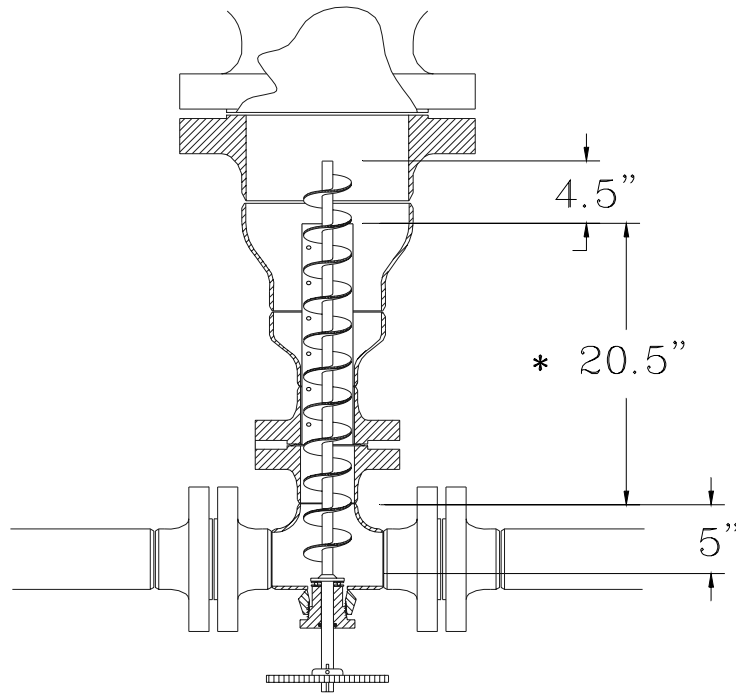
Modified Auger underneath Cuttings Injection Hopper
